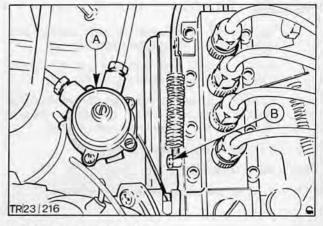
Fuel injection pump A – Fuel lift pump B – Pump bleed bolt
